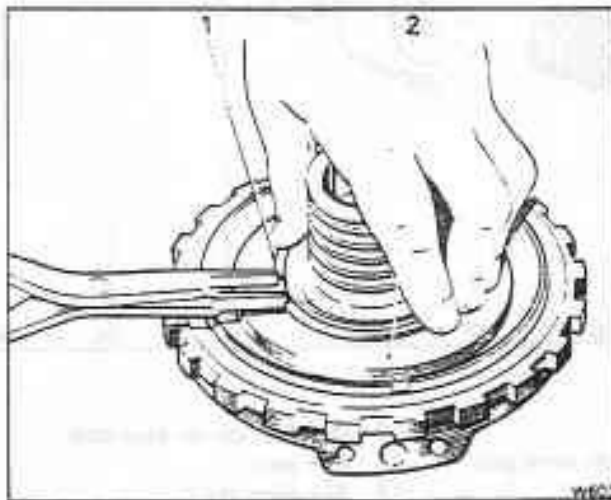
Removing and fitting the intermediate clutch piston snap ring
